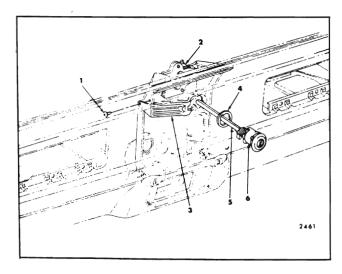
Rear Compartment Lid Lock Cylinder Assembly - Chevrolet "F" Style Shown
